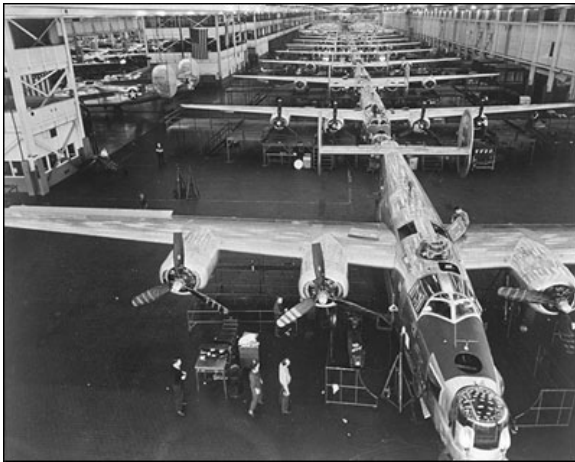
Final Assembly, Willow Run Plant, 1944
